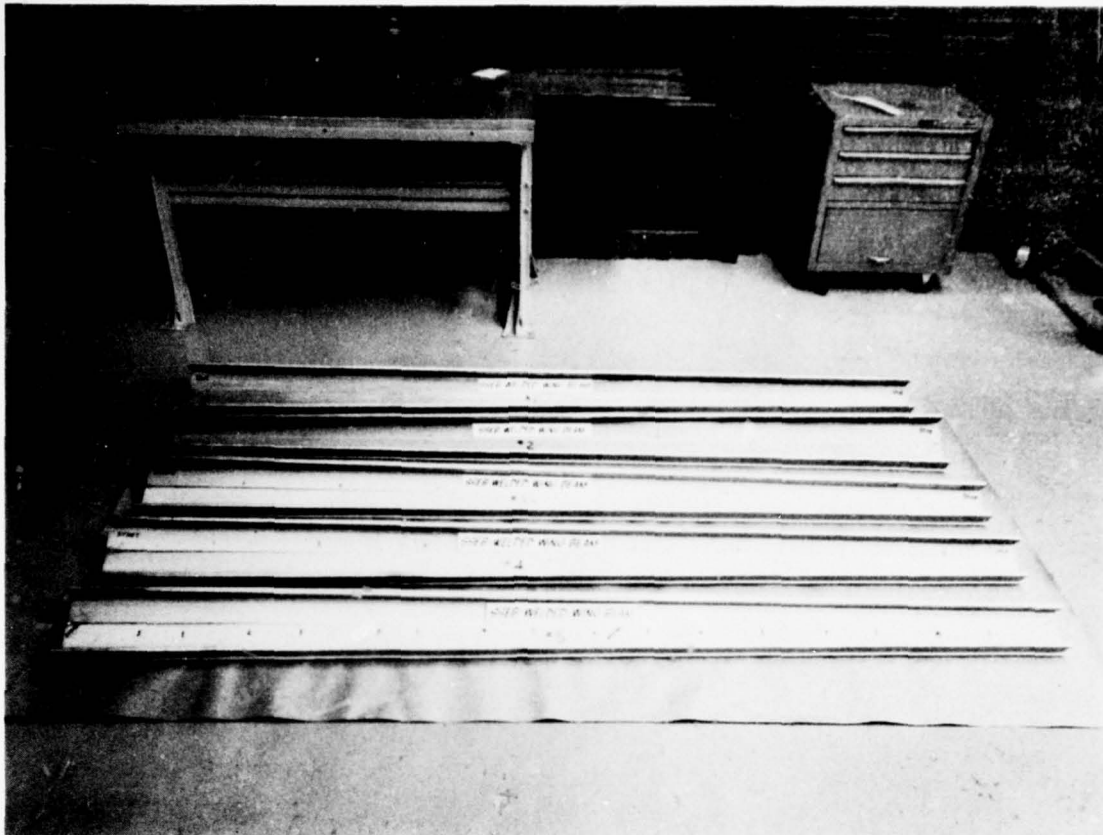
Five, 9-Foot-Long, SSEB Welded Wing Beams
